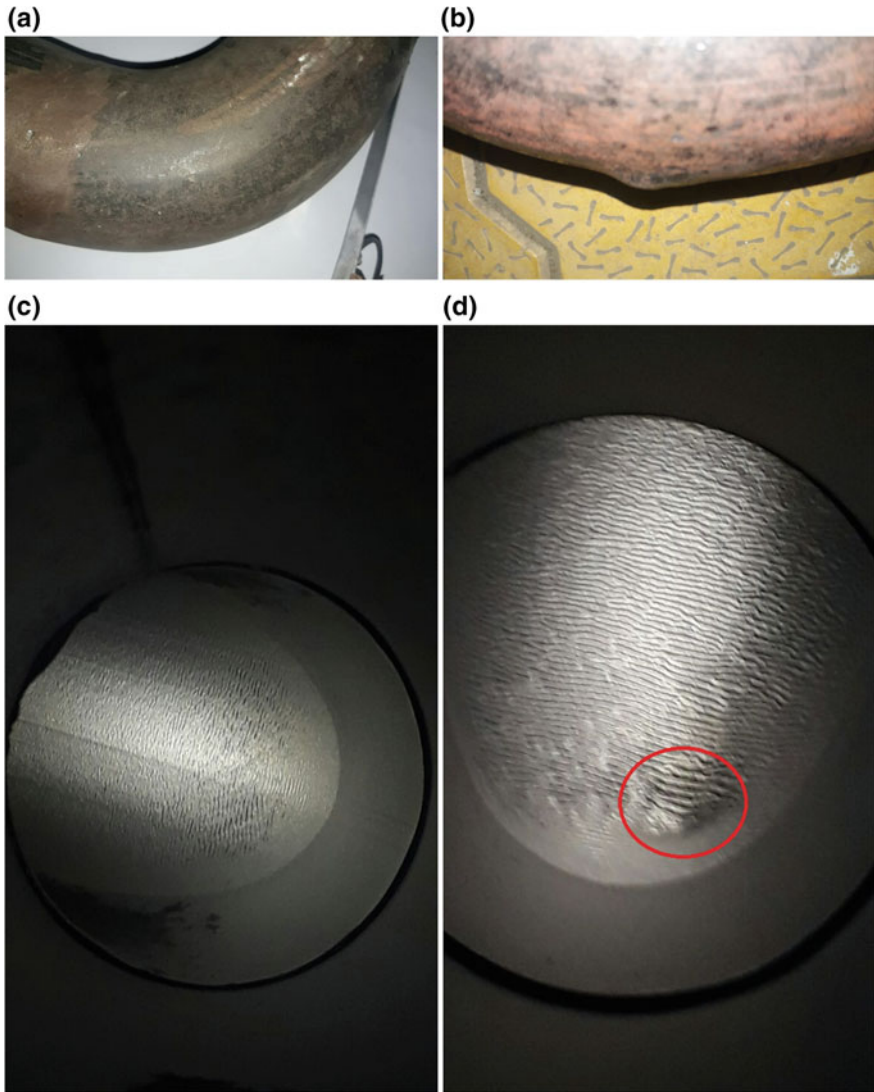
a Undamaged pipe specimen, b damaged pipe specimen from outside, c undamaged pipe specimen, d damaged pipe specimen from inside
